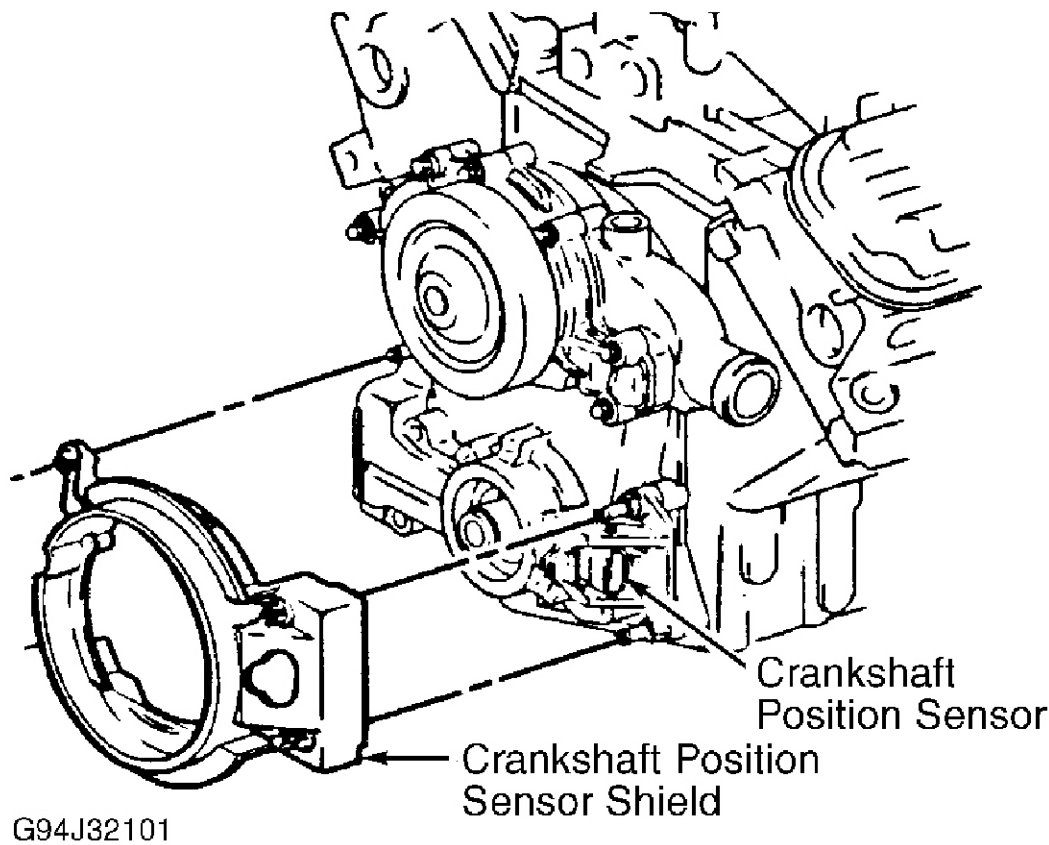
Removing Crankshaft Position Sensor Shield (C³ I)
